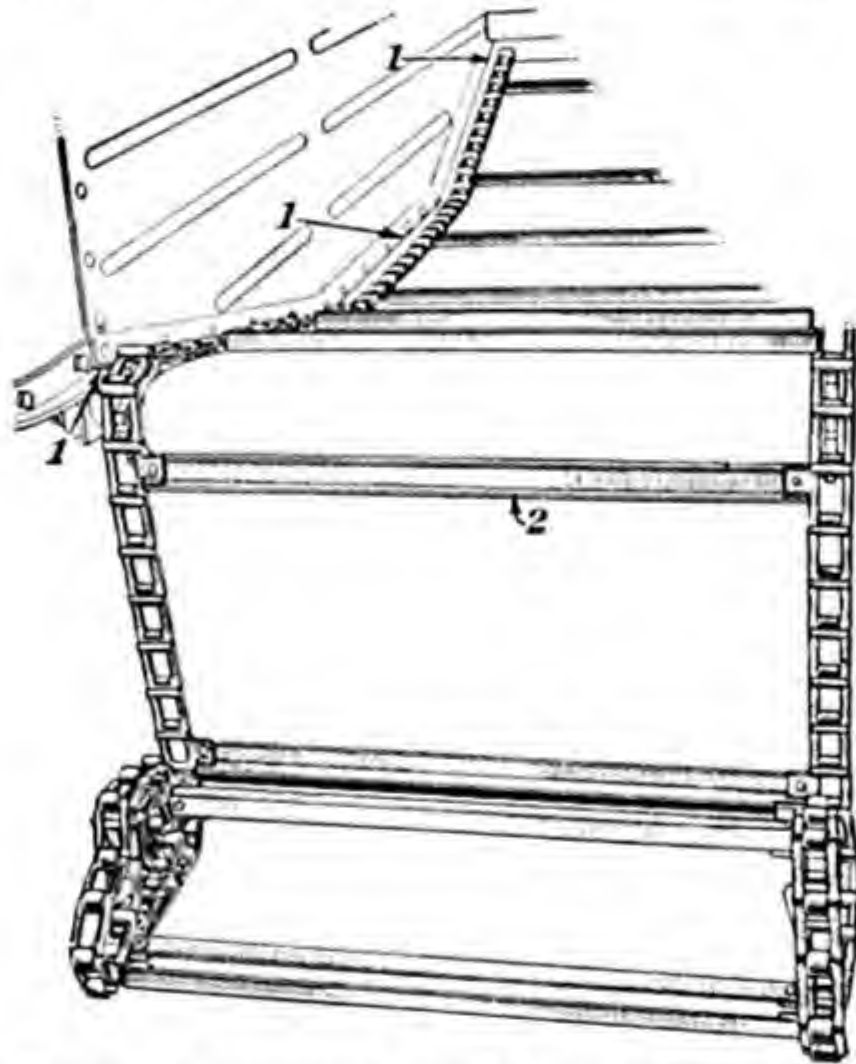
Section of conveyor and tight bottom for liquid manure.
